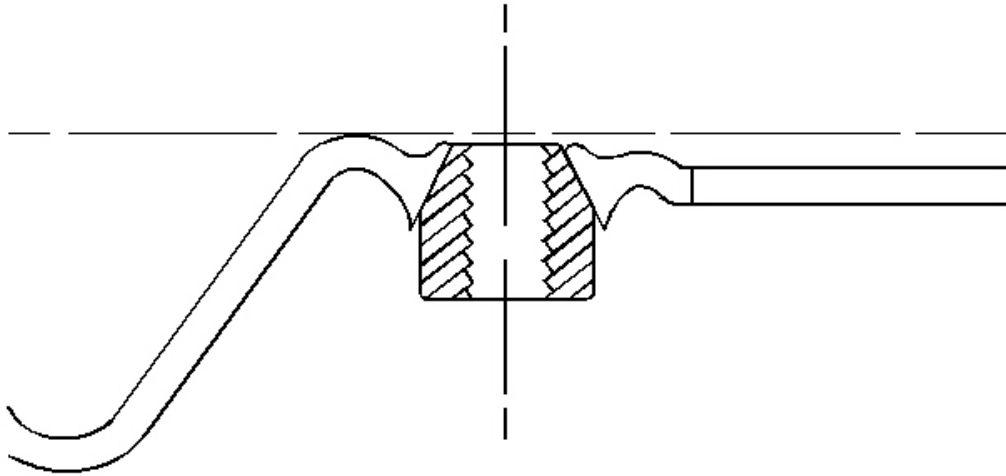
Inspecting Mounting Wheel/Nut Holes
